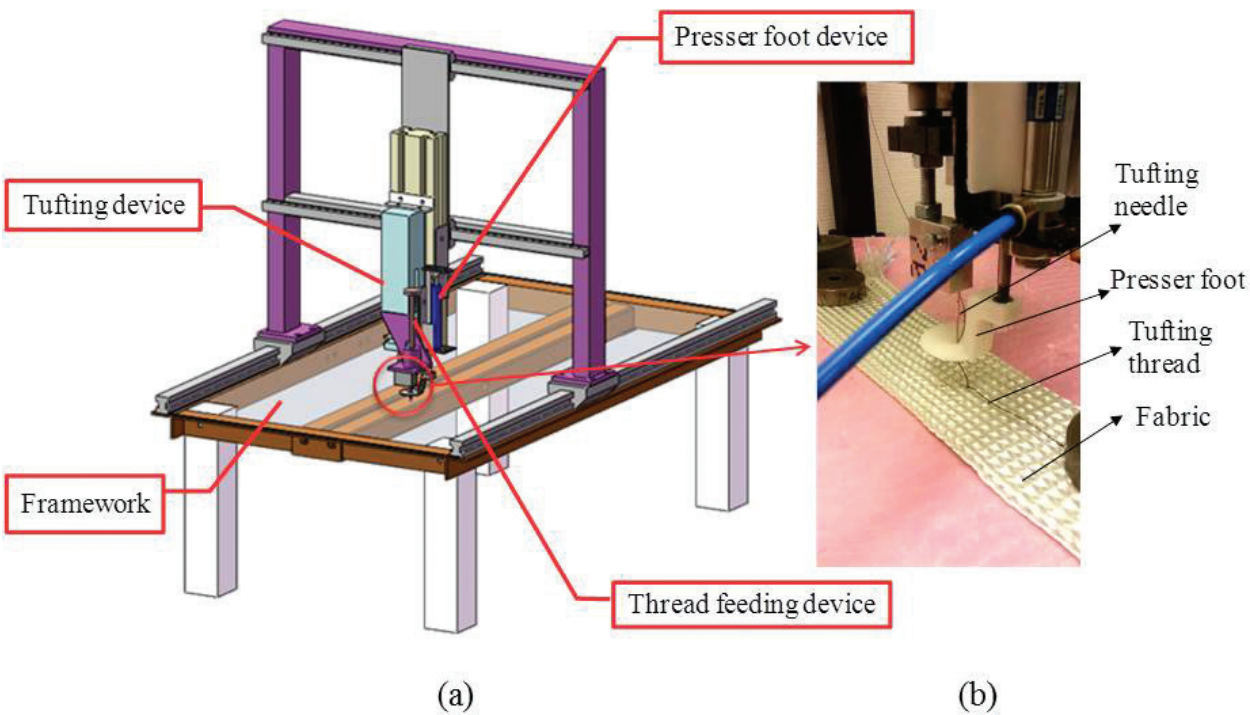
The tufting equipment (a) and zoom of the tufting head (b).
